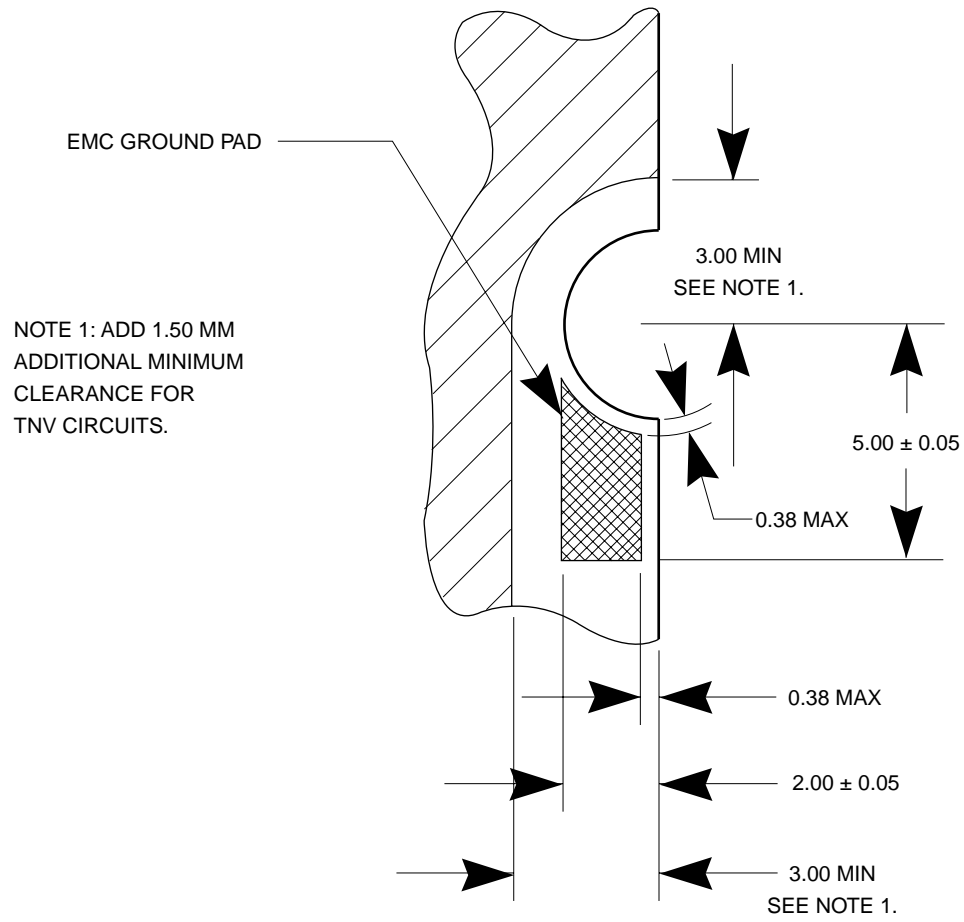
Type III PCB, Top Side, Detail B (2X)
